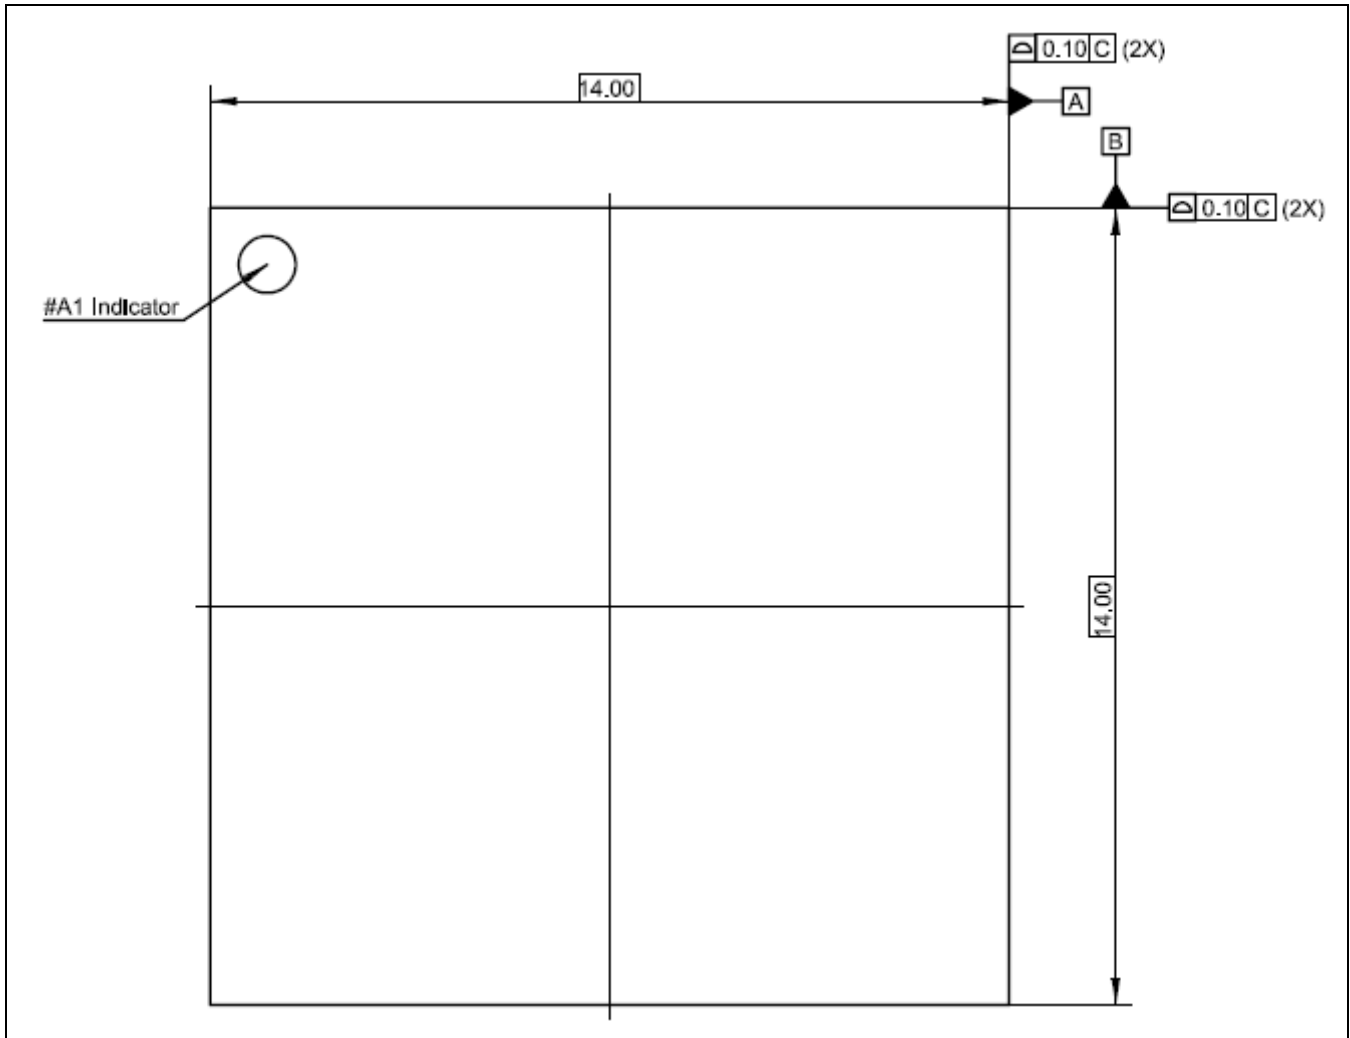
1 S5PC100 Package Dimension (580-FCFBGA)- Top View
